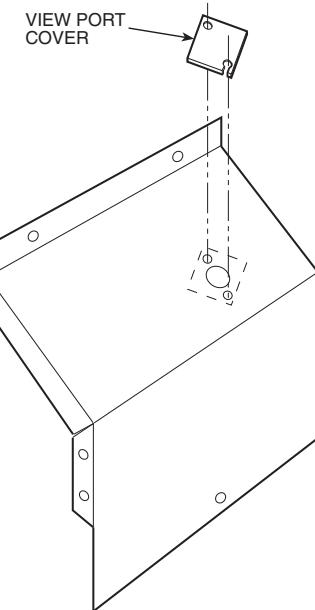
Inlet Hood View Port Cover Installation (14-in.)
